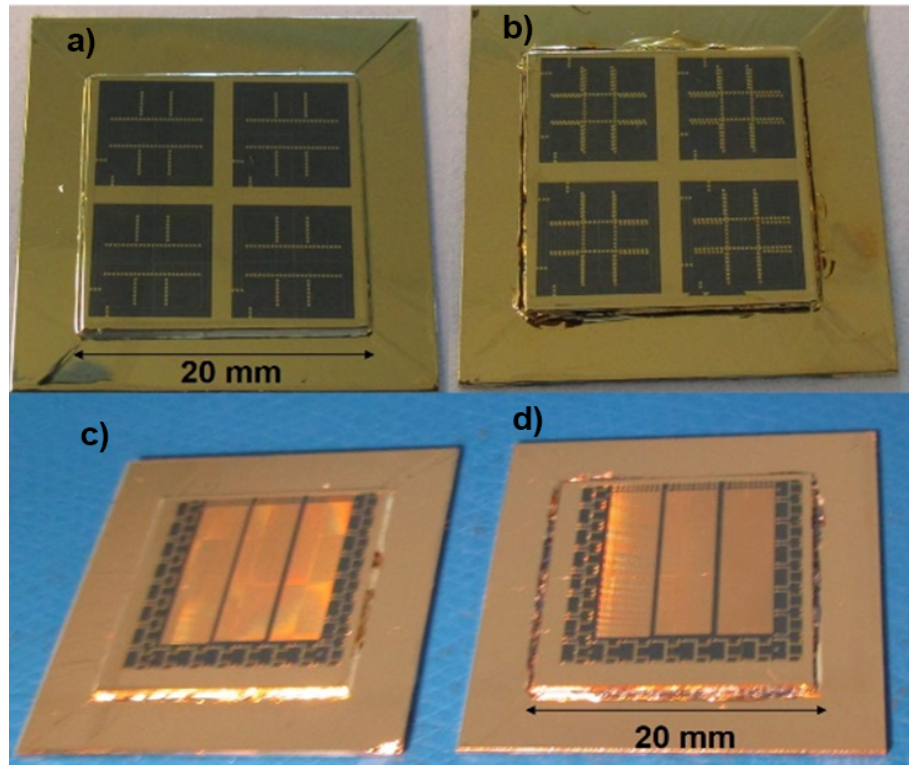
Passive circuit demonstration on top of a 16-chip ELAIC assembly: a) A single metal layer RDL; b) A double metal layer RDL deposited on BCB; c-d) A daisy chain circuit created on top of a 16-chip ELAIC assembly using multi-layer BCB dielectric.
